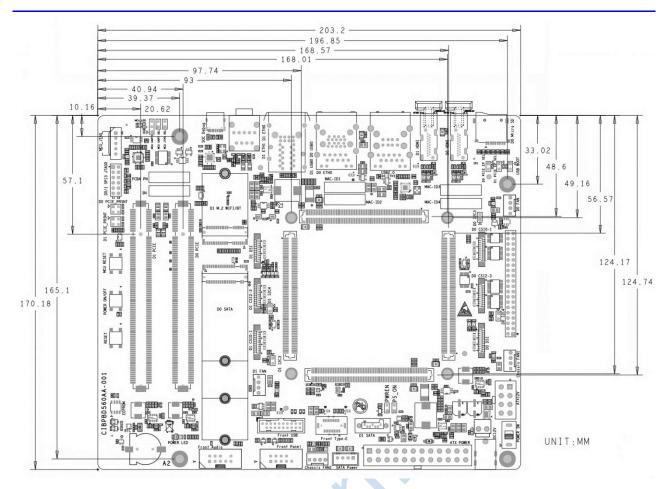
EIC7702X Bottom plate mechanical dimensions
